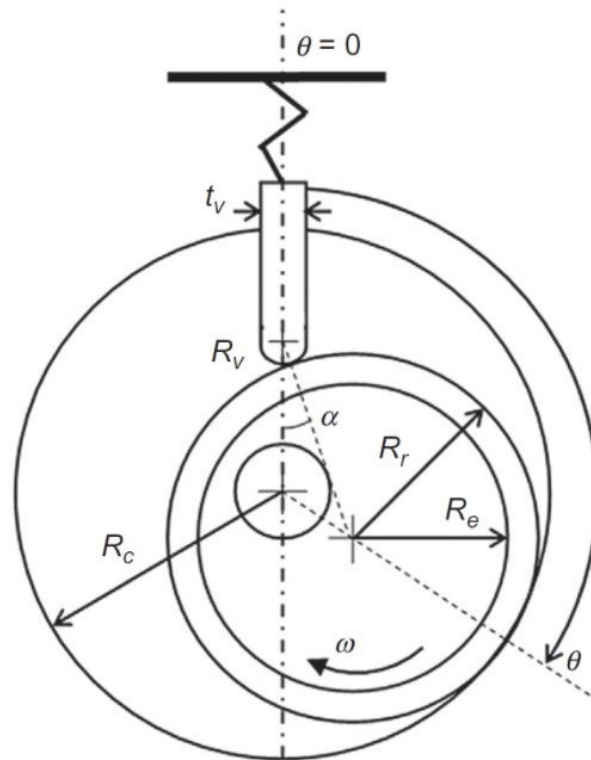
Major dimensions of a rolling piston compressor [3]
